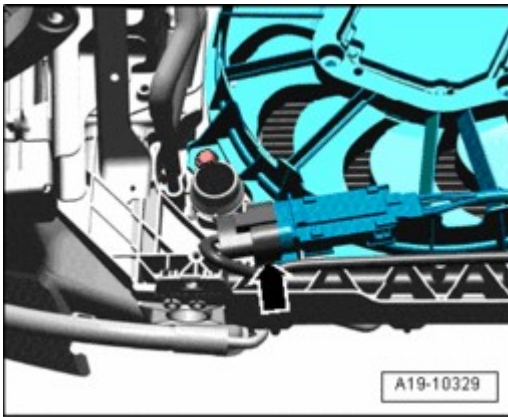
Disengaging Electrical Connector From Bracket At Left Of Lock Carrier
